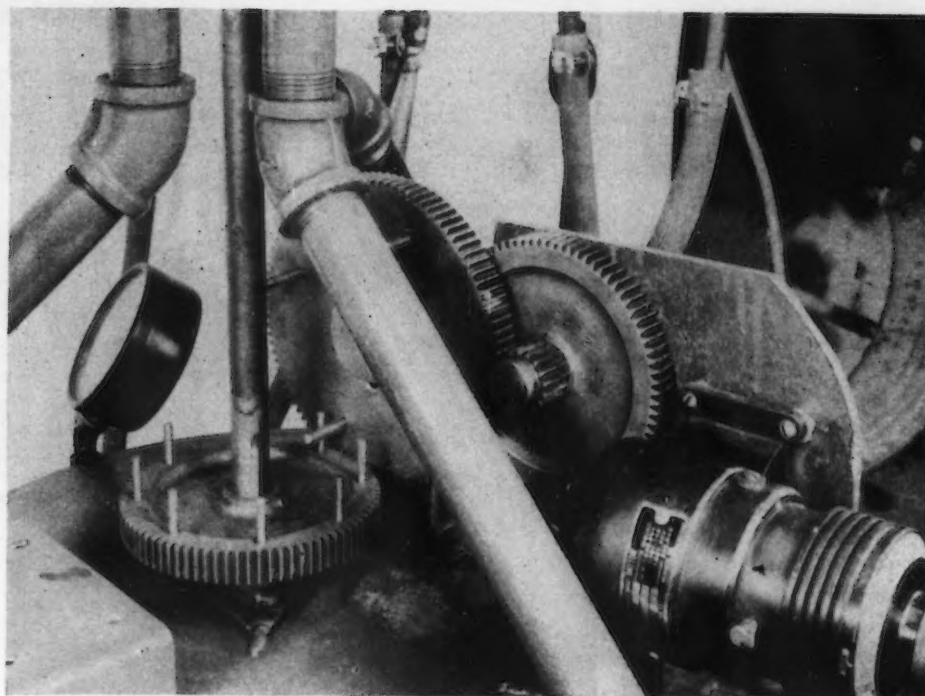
Driving mechanism for the vertical shaft between the two pipes. The motor at right drives through spur gearing to the pin gears which provide intermittent motion.
